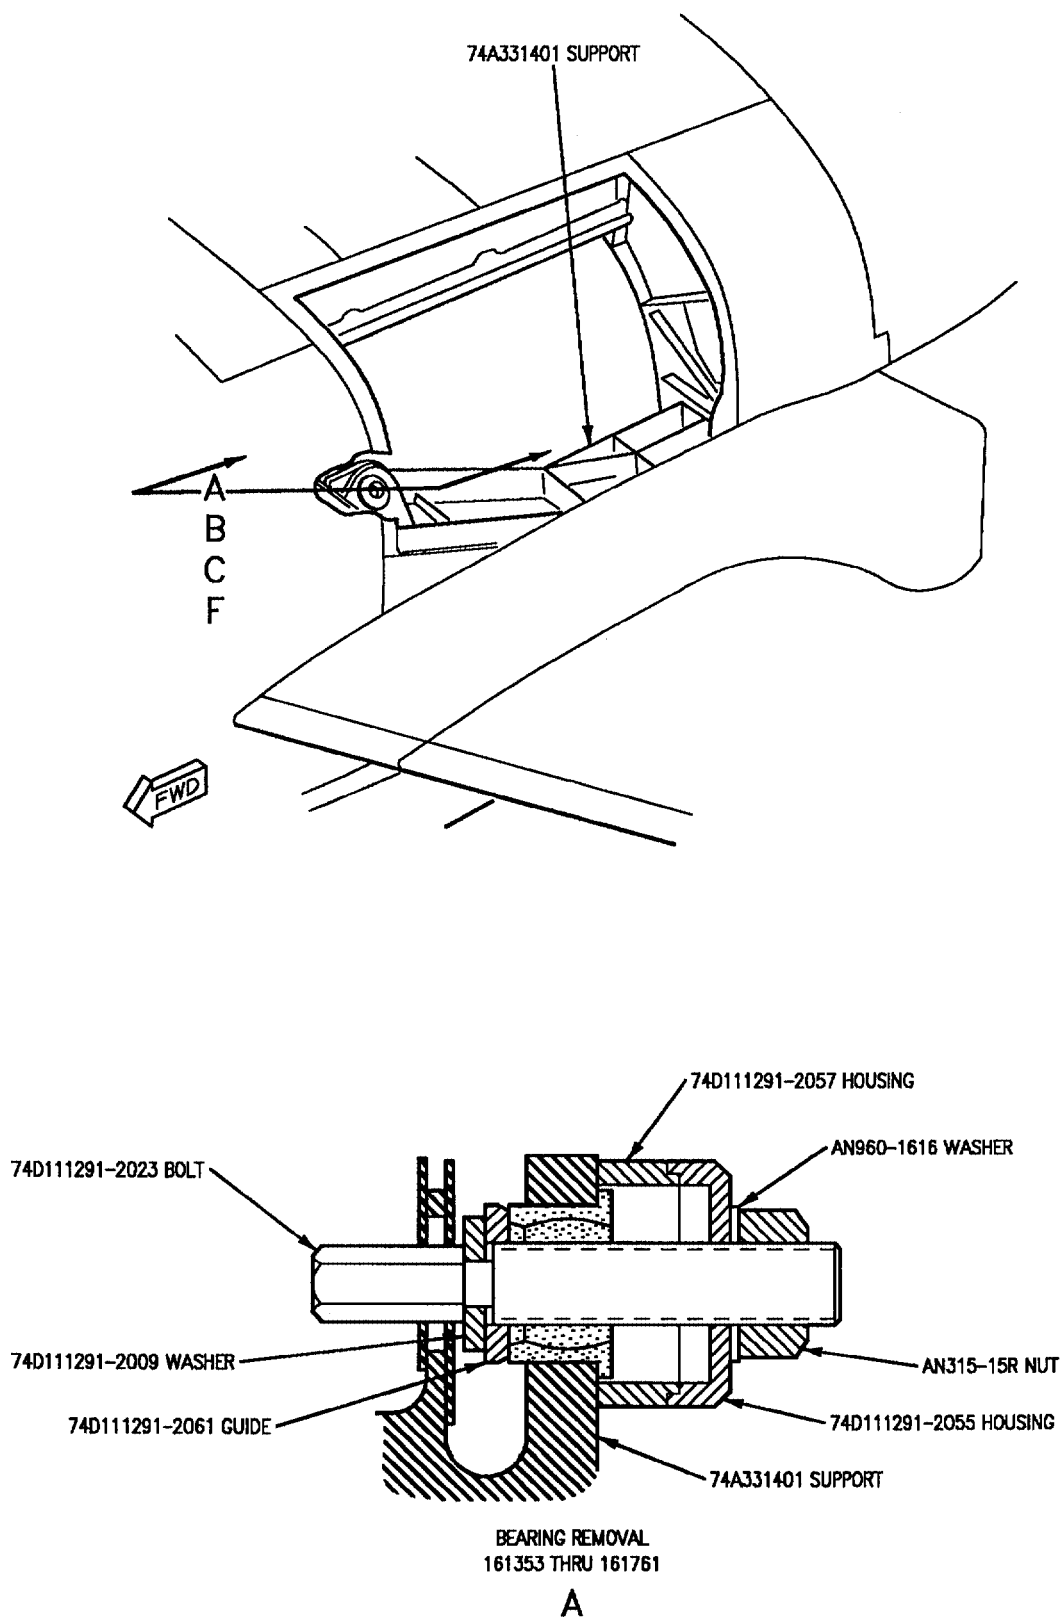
Support 74A331401, Bearing KDP16 Repair (Sheet 1)
